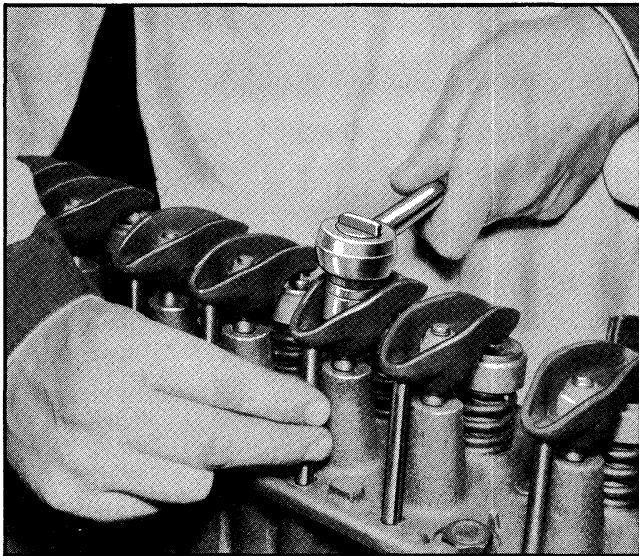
Adjusting Valve Lifter Plunger Travel
